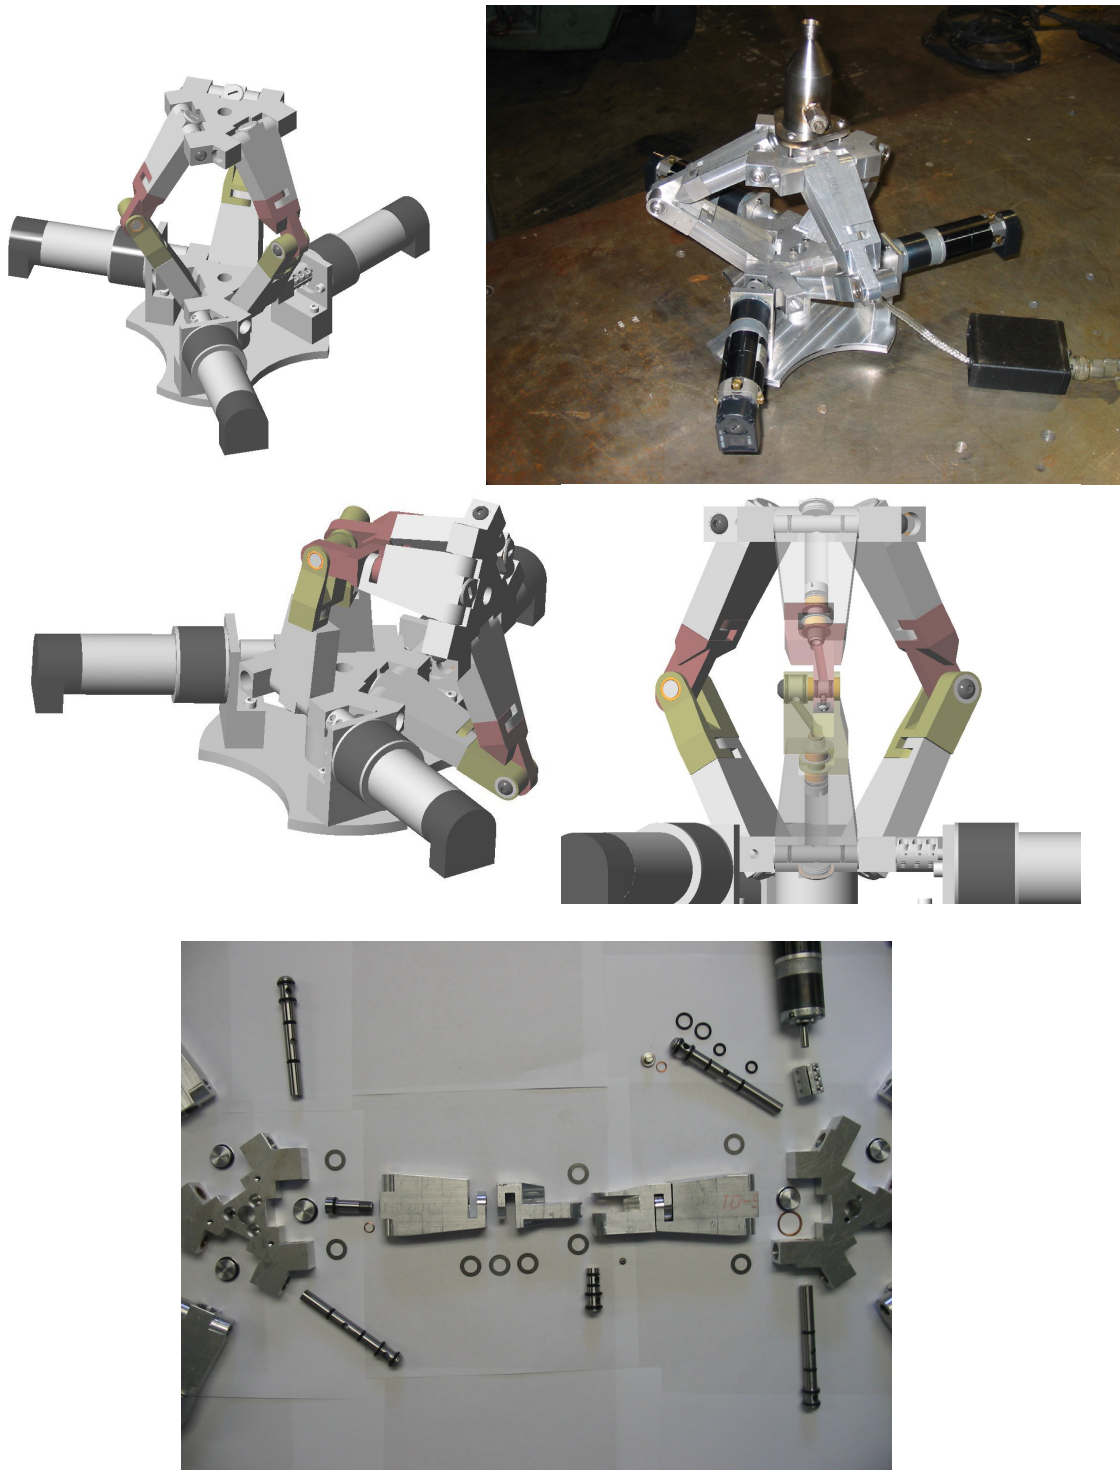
3 DOF Mechanism as CAD Models, Assembly
